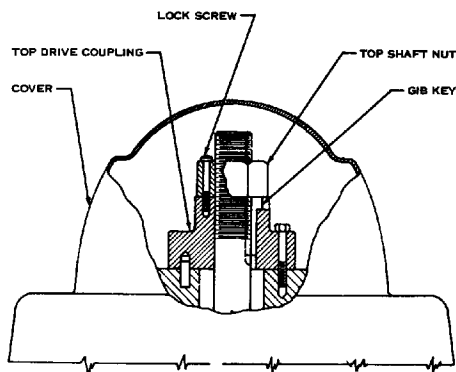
Typical Hollow-Shaft Motor Or Gearhead Coupled to Pump Top Shaft.
